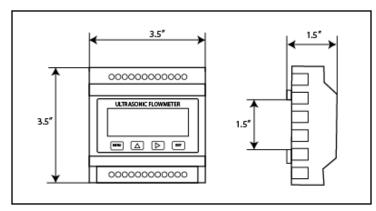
Dimension Drawing of 1200A-100H Handheld Ultrasonic Flow Meter
